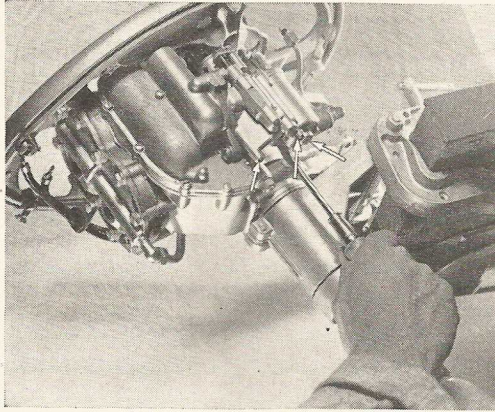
Showing removal of check valve screen assembly and drain screws for cleaning purposes. (carburetor)
